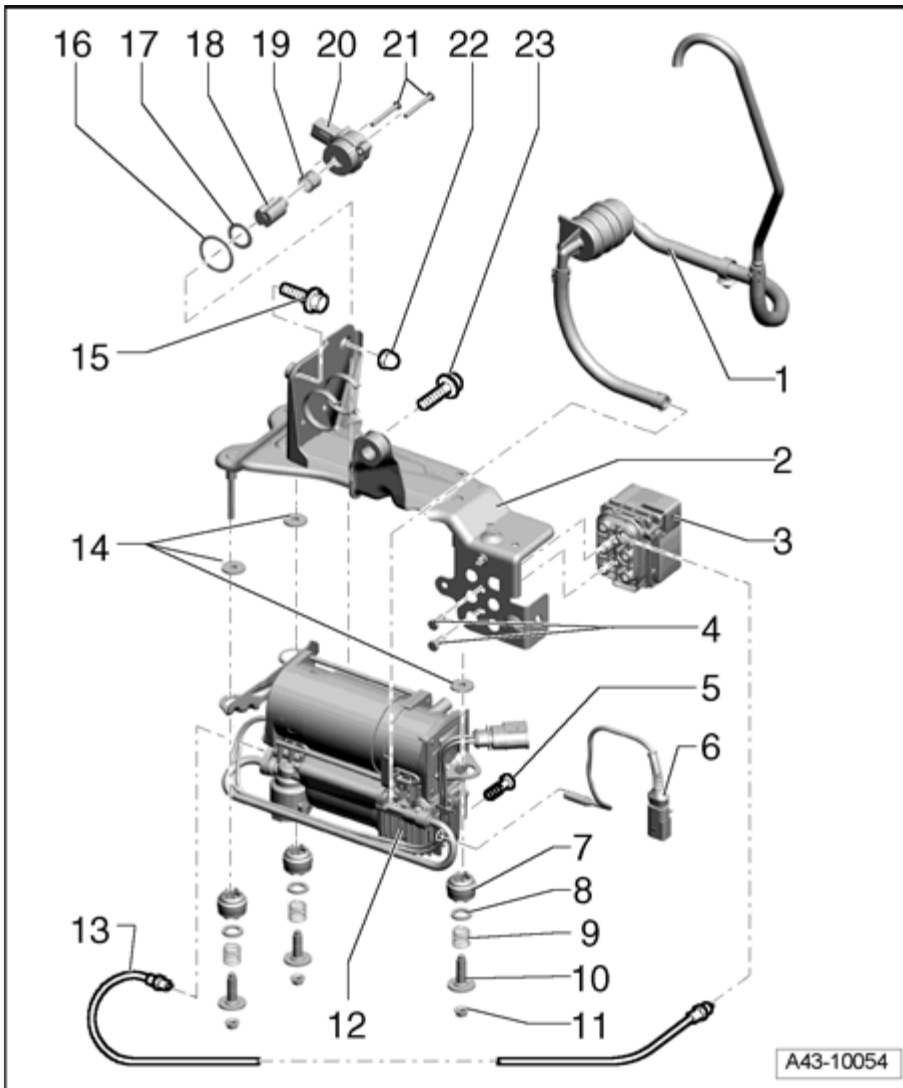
Air Supply Unit And Solenoid Valve Block, Assembly Overview
